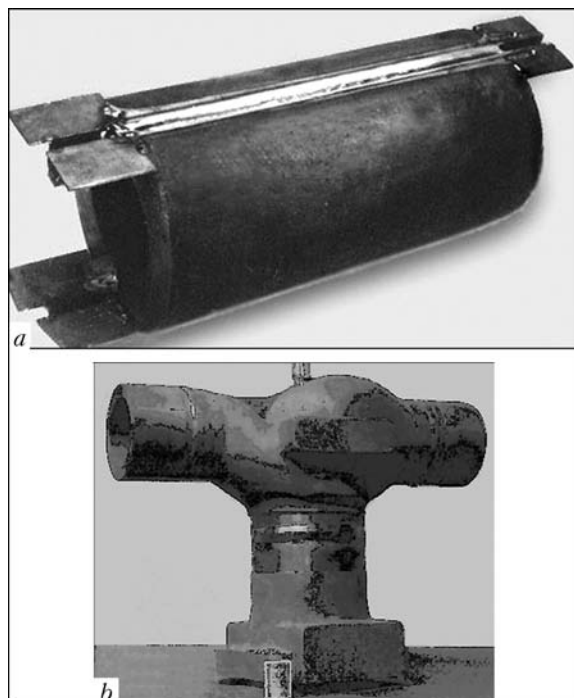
Examples of application of argon-arc narrow-gap magnetically-impelled arc welding: *a* – welded cylindrical cathode for production of copper foil (VT1-0, 50 mm thick); *b* – casing of a pump for transportation of aggressive fluid (alloy PT3V, grade 9, 50 mm thick)
